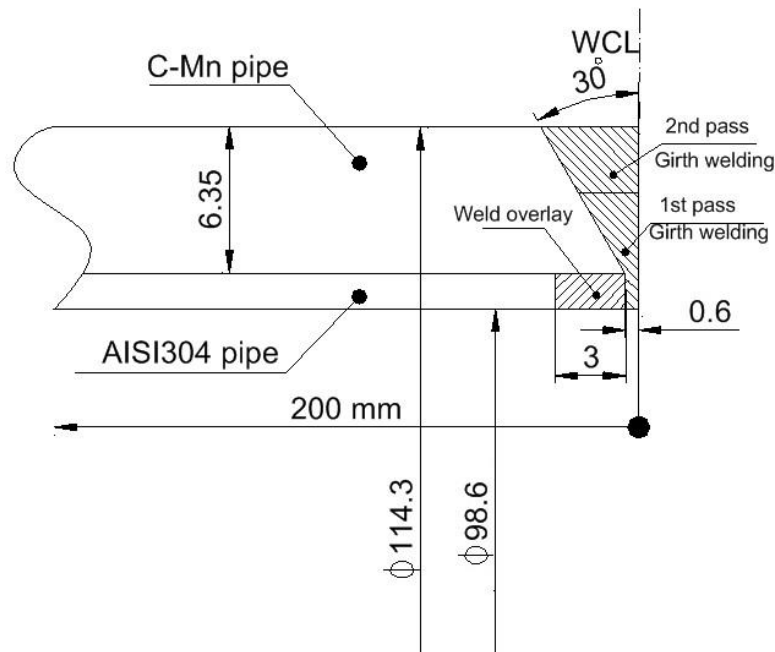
Schematic semi-sketch of welded lined pipe, dimensions in mm
